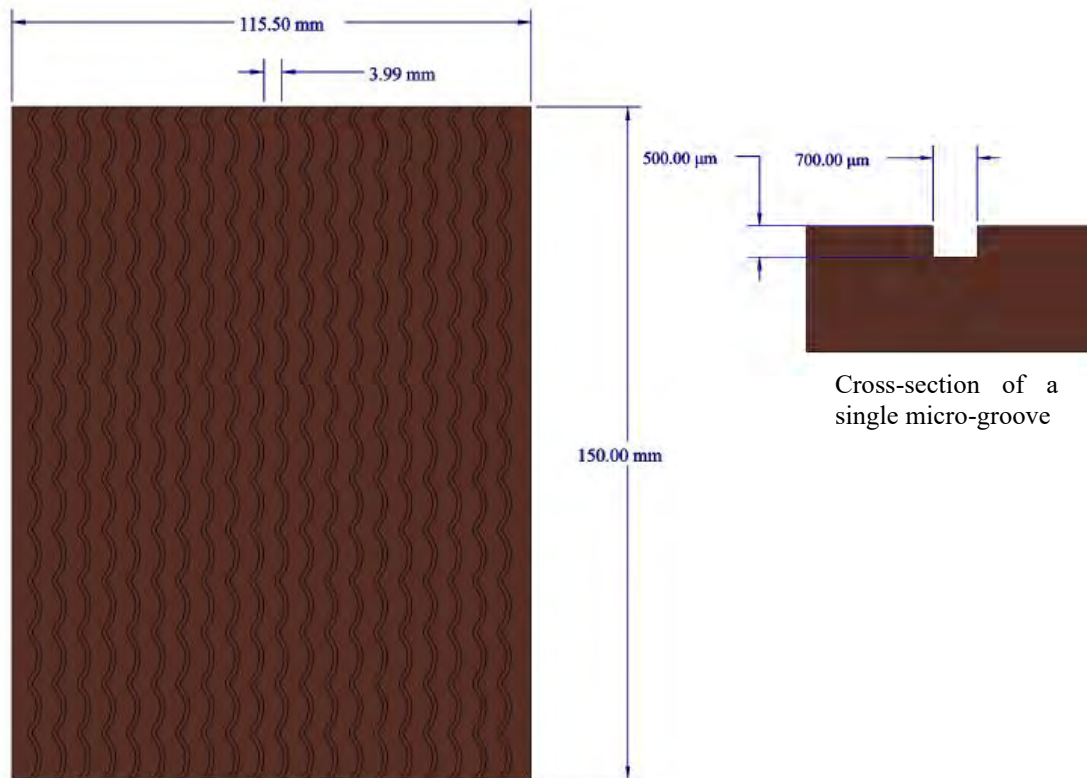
Sinusoidal shaped micro-grooved copper plate
